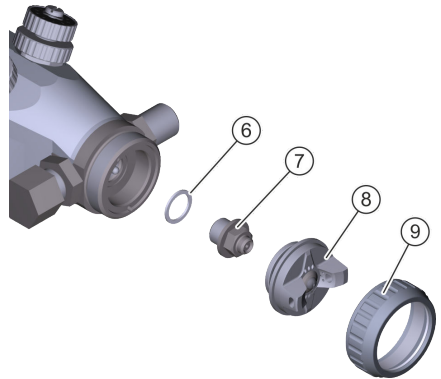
Disassemble air cap, seal retainer screw and sealing ring
